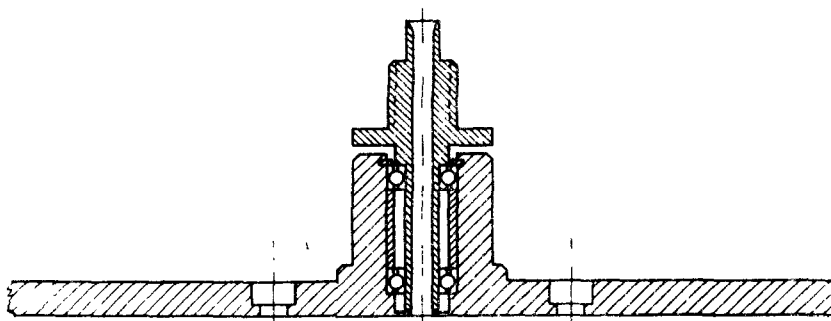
Design of a Non-Rotating Aerosol Intake Tube on the Rotor Lid of a Spiral Duct Centrifuge without Rotor Housing
